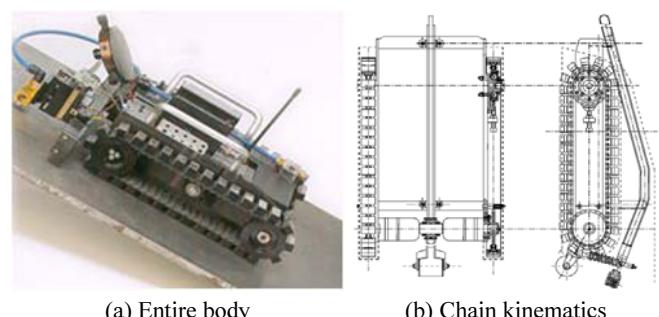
Wall climbing robot for inspecting oil tanks⁷⁸
